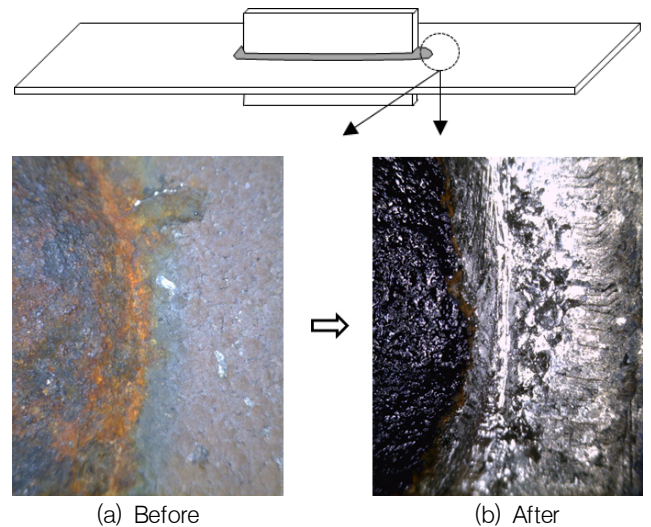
Weld toe before and after hammer-peening treatment
